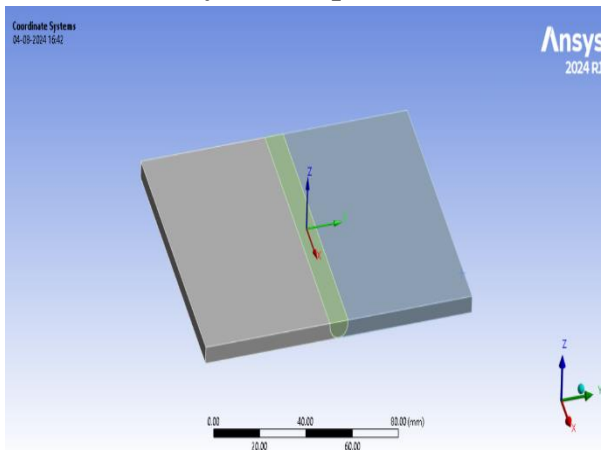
Coordinate System for AA6351 aluminum alloy welded plate
